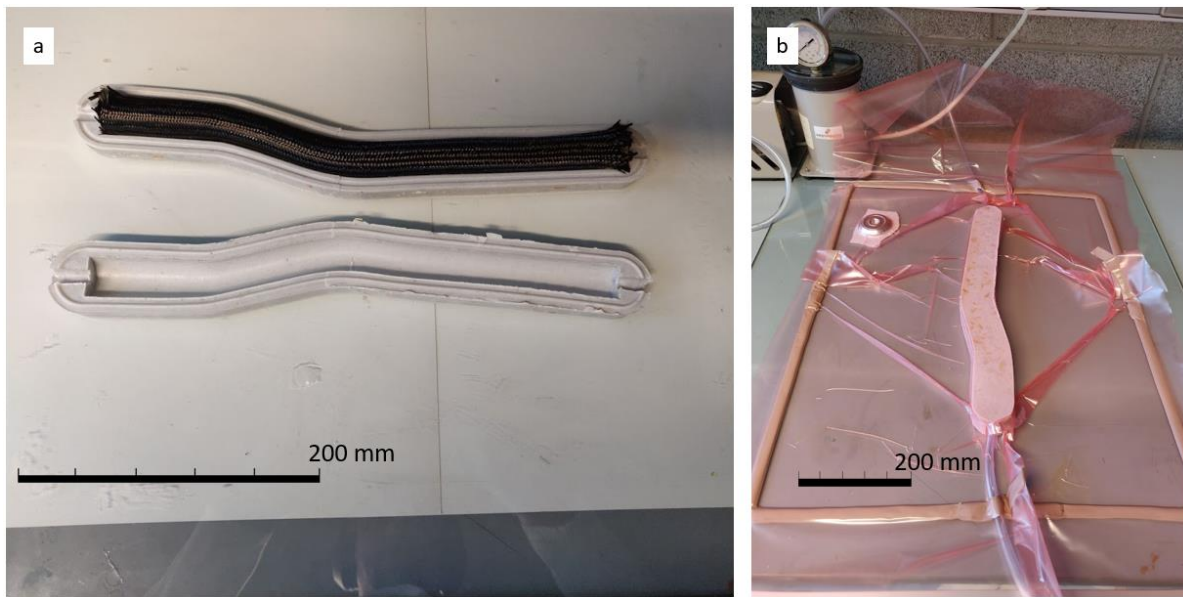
(a) Flexible silicone tooling used for greater control over the external surface finish of the CFRP product. (b) Tabletop bagging used for the silicone mould
